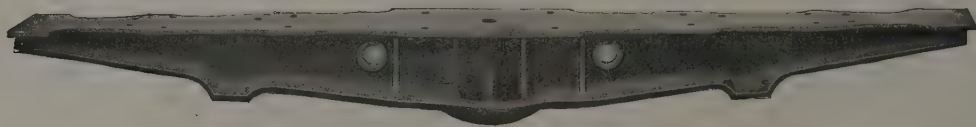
Cast Steel I-Section Body Bolster. American Steel Foundries.
